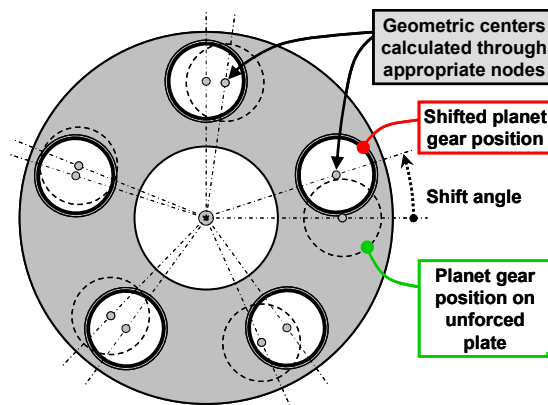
Nodes on the planet gear mounting posts of the carrier plate model are used to approximate the geometric center of the planet gears and estimate the planet-gear shift angles caused by deformation of the plate
